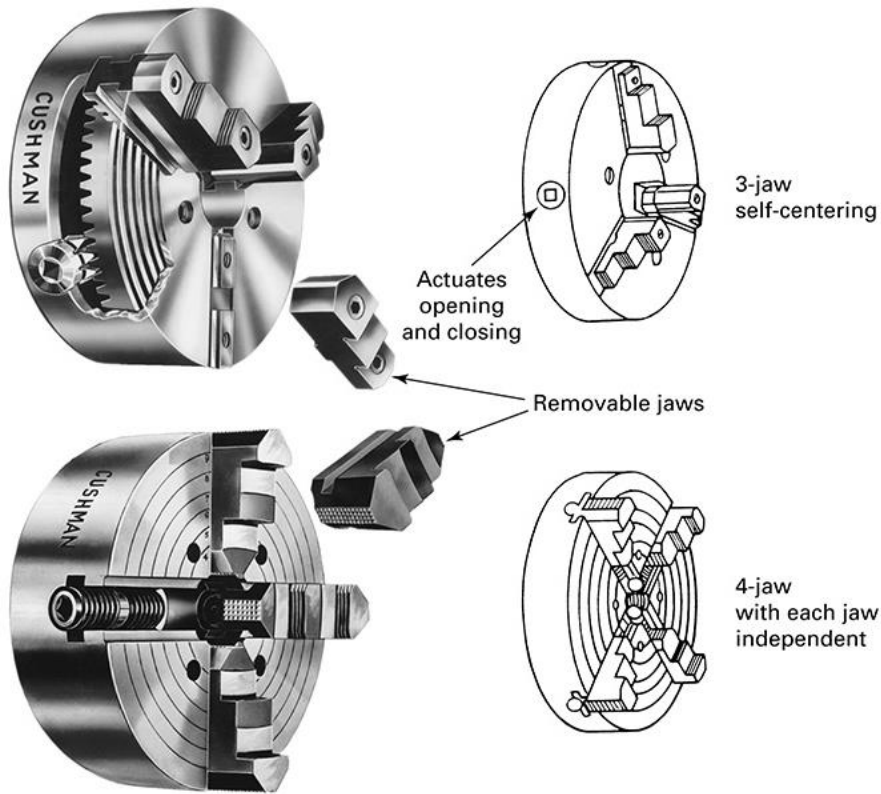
The jaws on chucks for lathes (four-jaw independent or three-jaw self-centering) can be removed and reversed.
